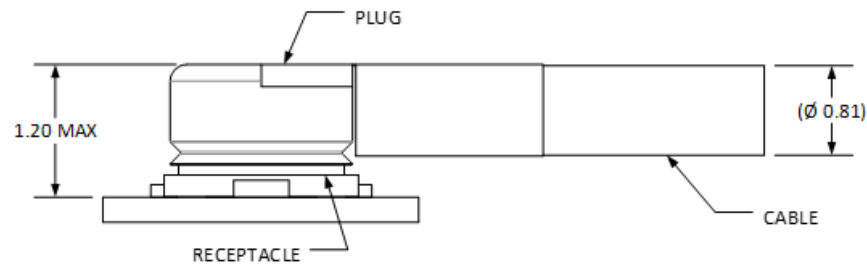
Mated Plug for Ø 0.81 mm Coax Cable
